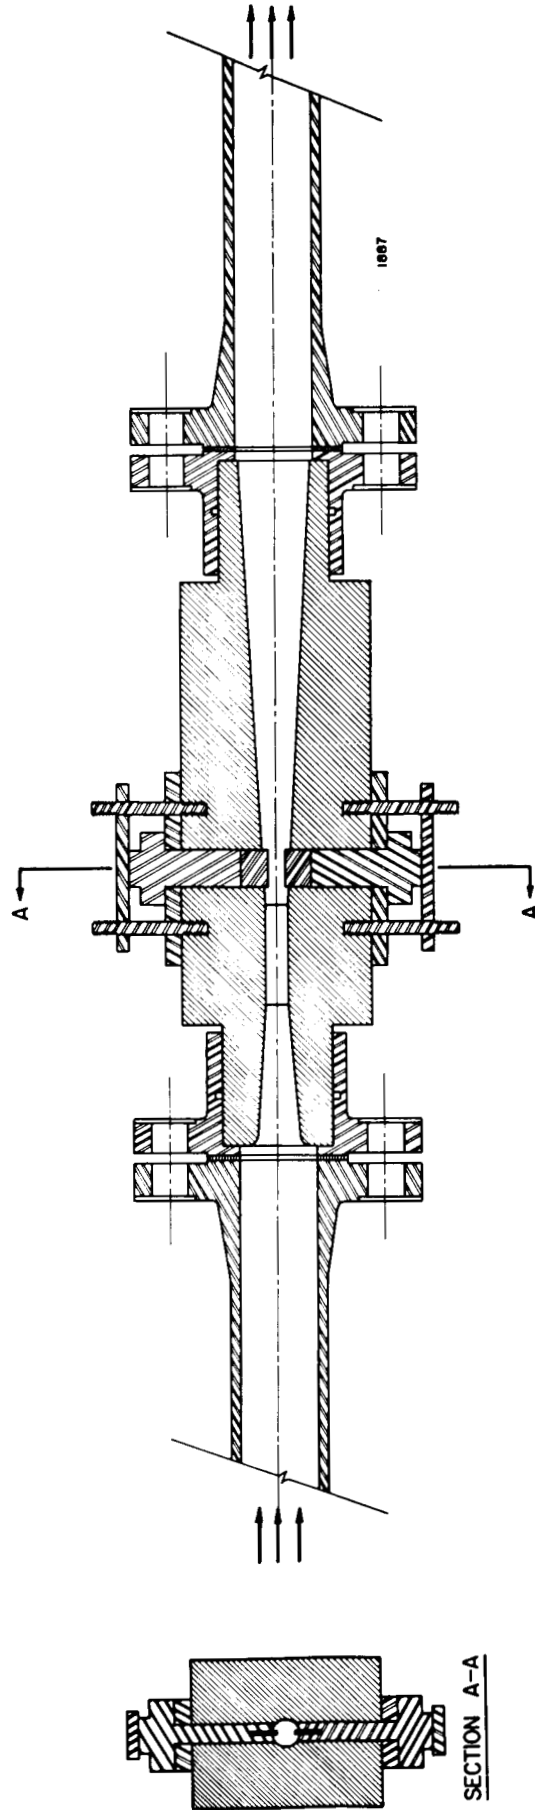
1/2" plexiglas damage venturi, 180° 2-specimen orientation, as installed in mercury facility.
